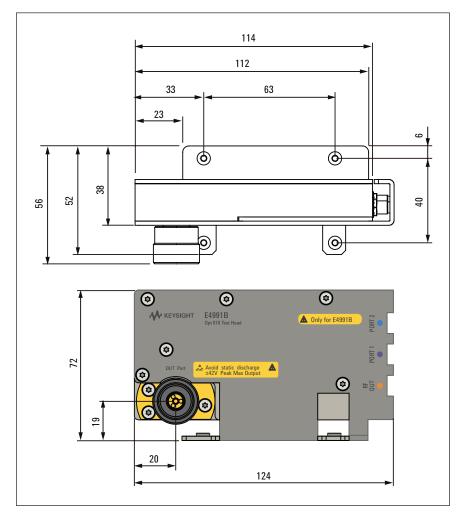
Option E4991B-010 test head dimensions (in millimeters)
